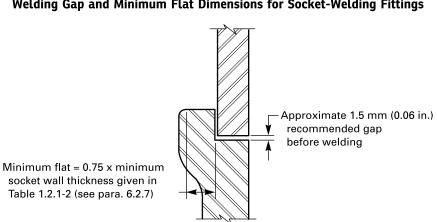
Welding Gap and Minimum Flat Dimensions for Socket-Welding Fittings
